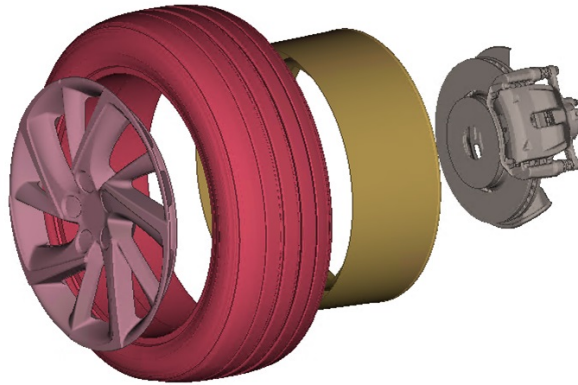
Left to Right: Spokes, Tire, Rim, Brakes Assembly
